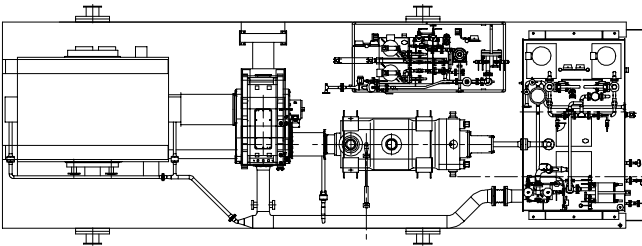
General Arrangement, with Motor, Gear, Pump, Lube Oil, and Mechanical Seal Support Systems.
